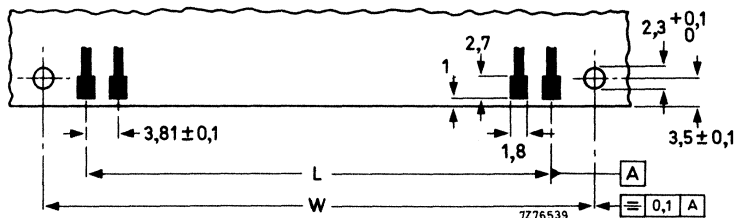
Recommended dimensions of the printed-wiring board to be fitted to the female part; see Table 5 for dimensions L and W.
